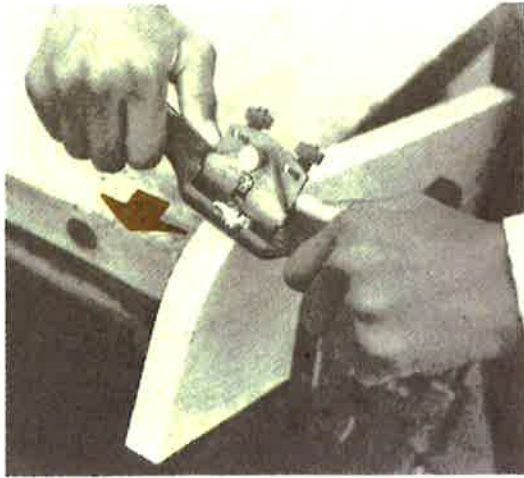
Pushing the spokeshave to smooth a convex edge.
